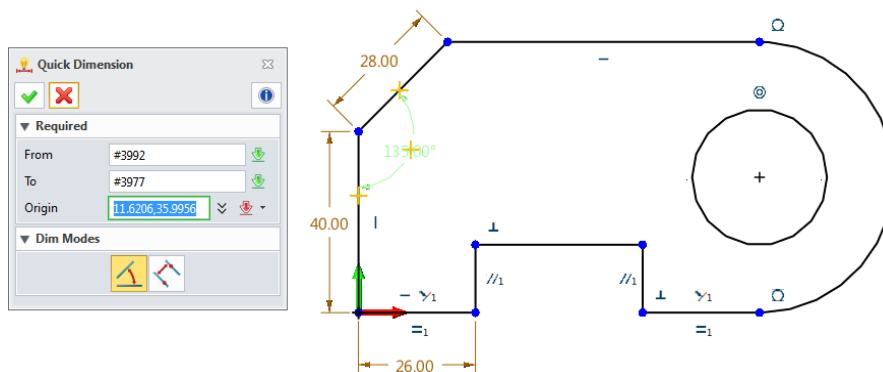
Quick Dimension—Picking Two Unparallel Lines
